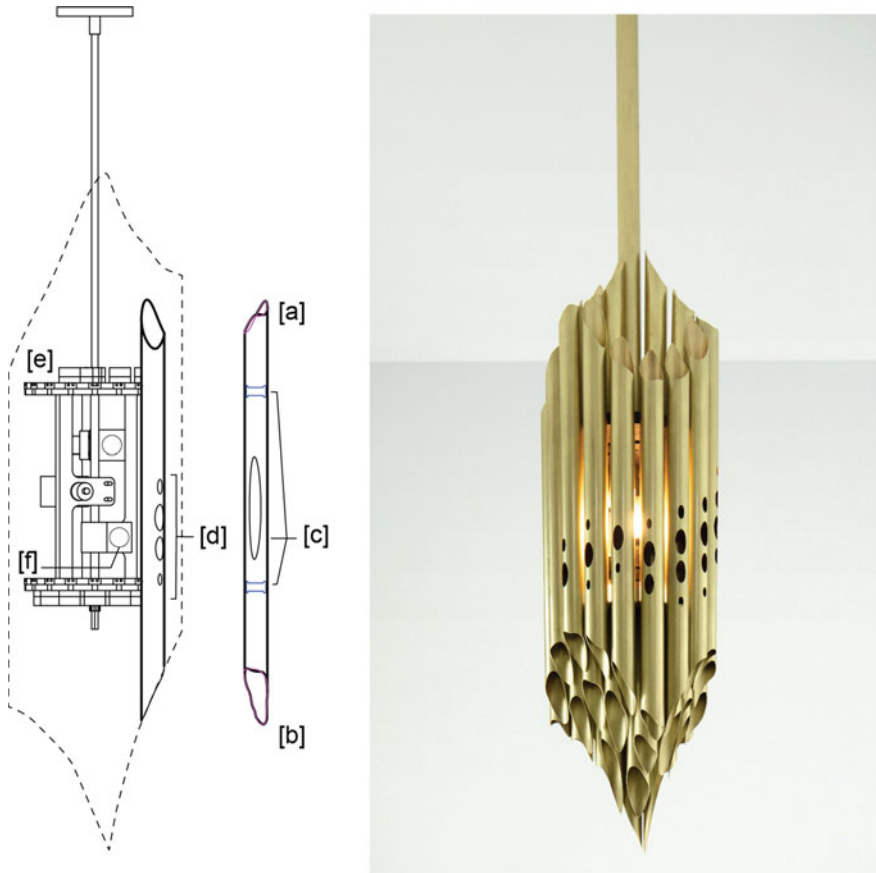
Robotically fabricated brass chandelier. Left, Diagram illustrating the overall design with the hanging frame structure and a typical pipe with the various openings. Right, the installed final outcome. Photography by Ben Hosking.
